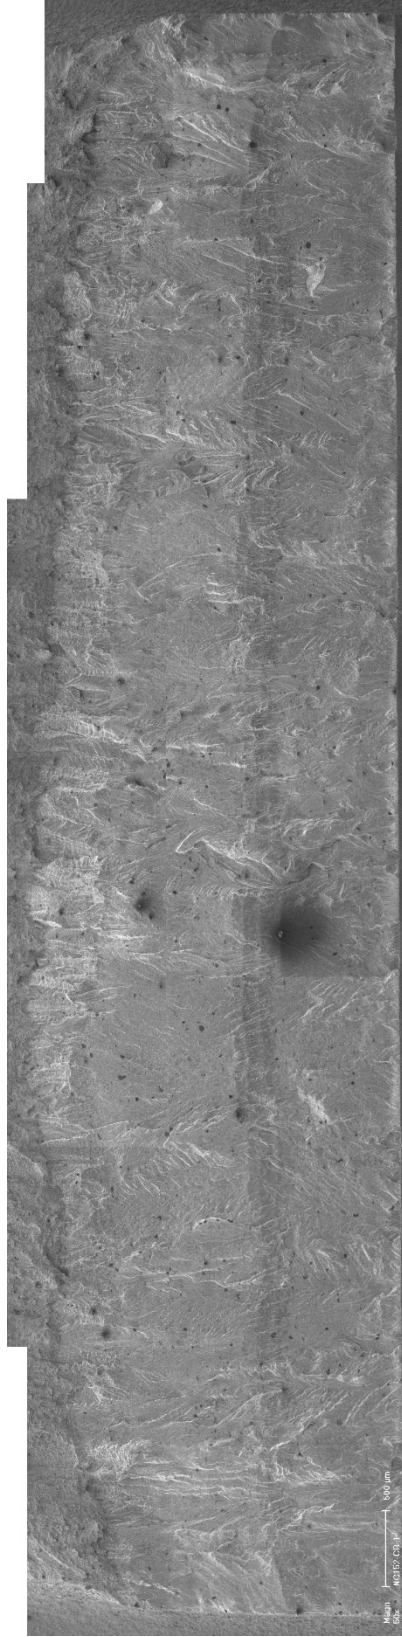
Fracture surface of Specimen NC152-CR-1. Crack advance is from bottom to top.
